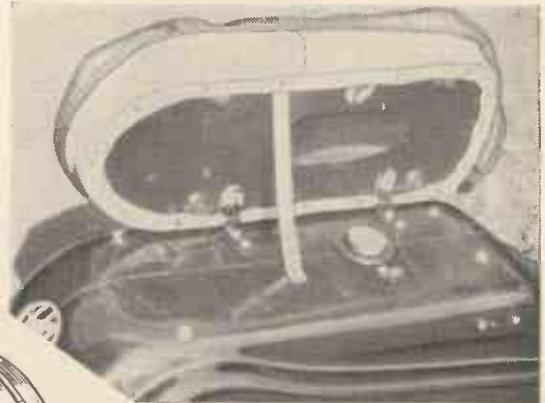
The four hexagon headed bolts that hold the body in position.
